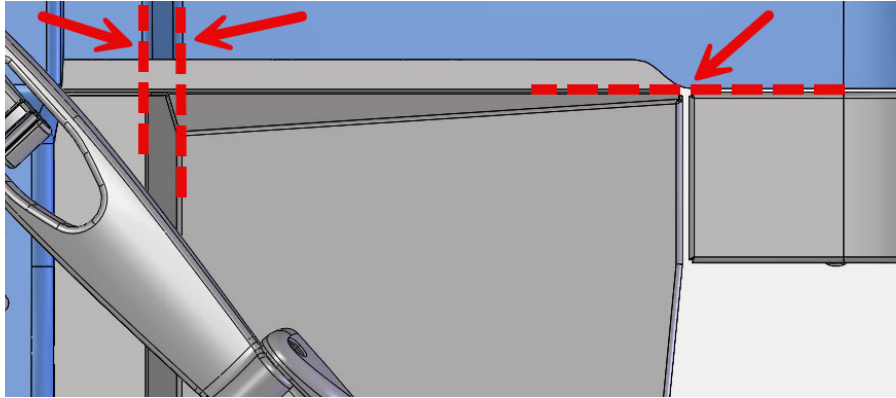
Fastening Stiffener Bracket to Hood Latch Bracket (Driver Side Shown)
